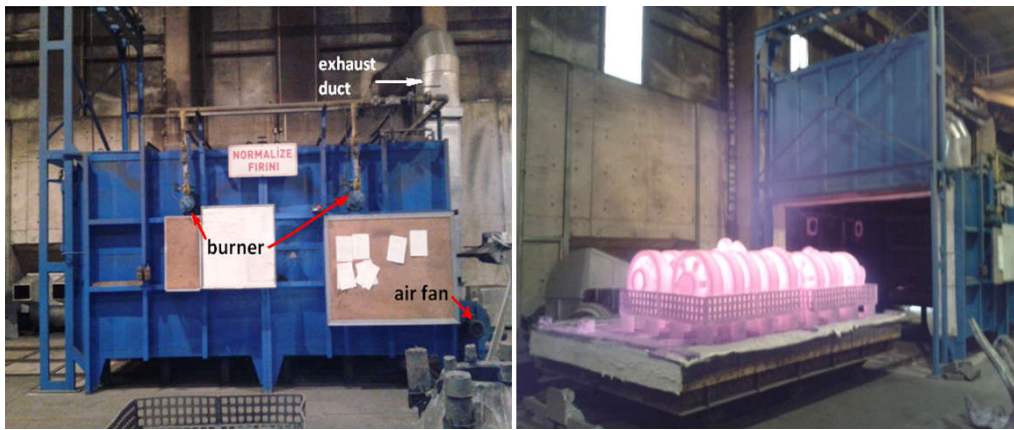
The heat treatment furnace in the plant and an example of a batch of steel workpieces right after heating
